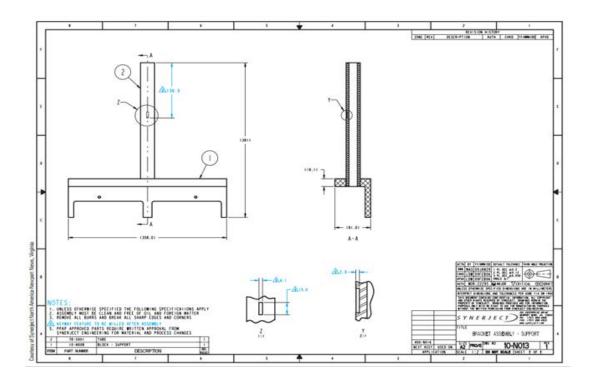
A process note applied to an assembly drawing. Dimension values in this Figure are in millimetres.
